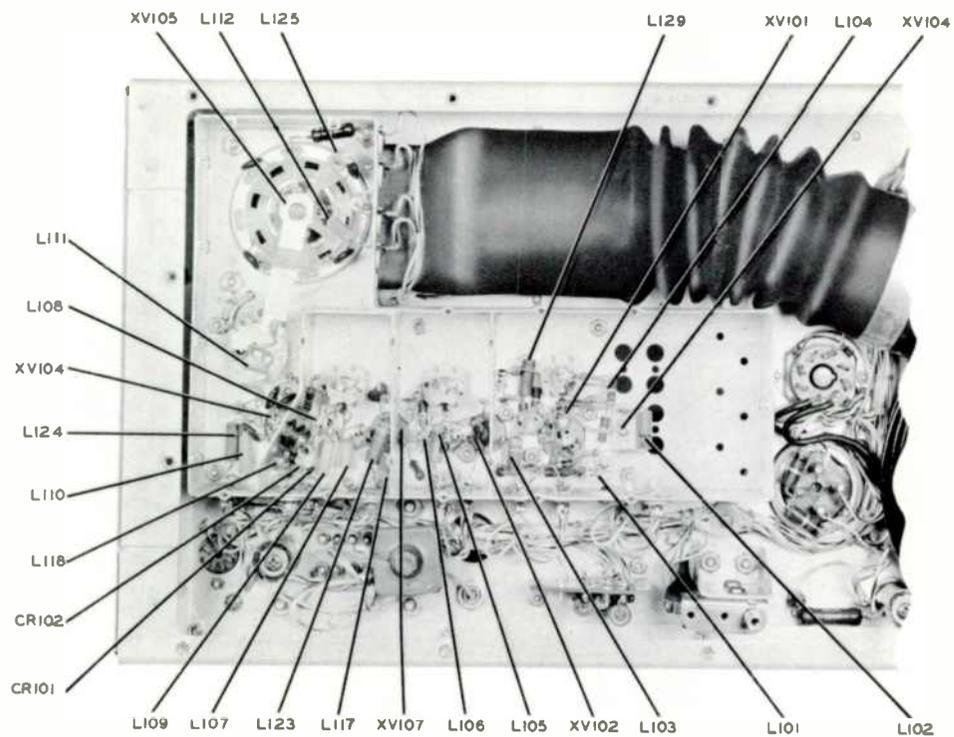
R-F Unit Subassembly, Cover Plate Removed
